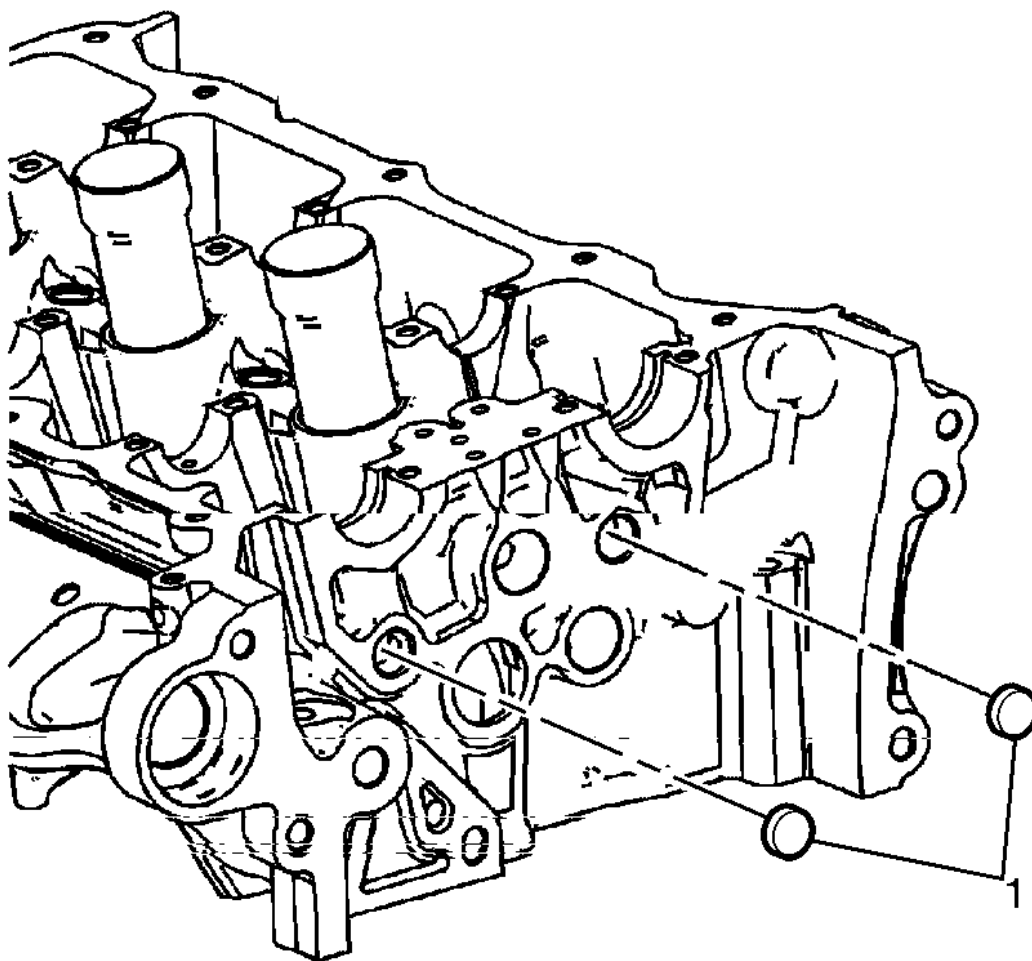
Identifying Cylinder Head Coolant Threaded Plugs
